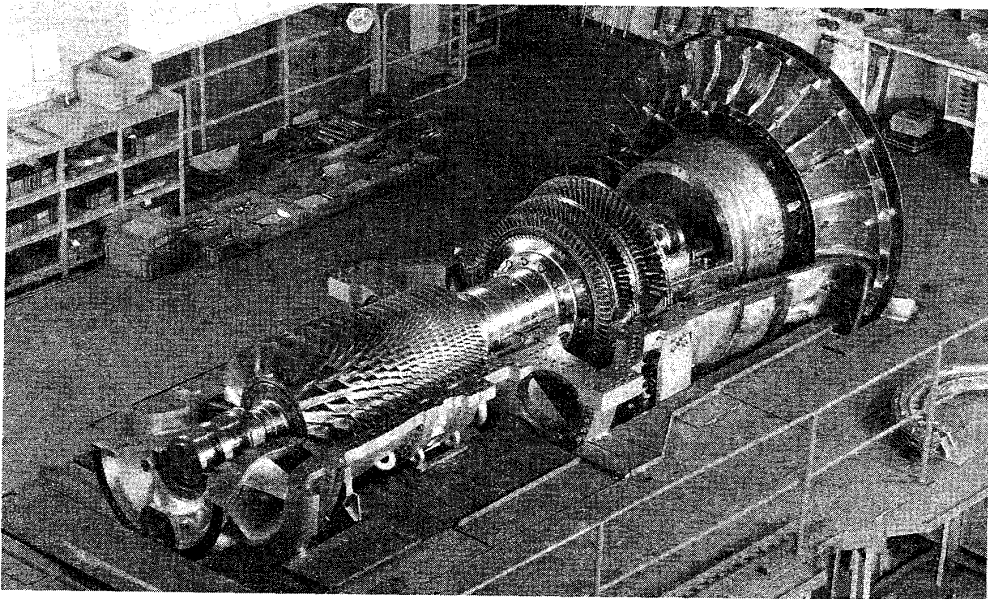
H-25 Gas Turbine Rotor and Casing Assembly
